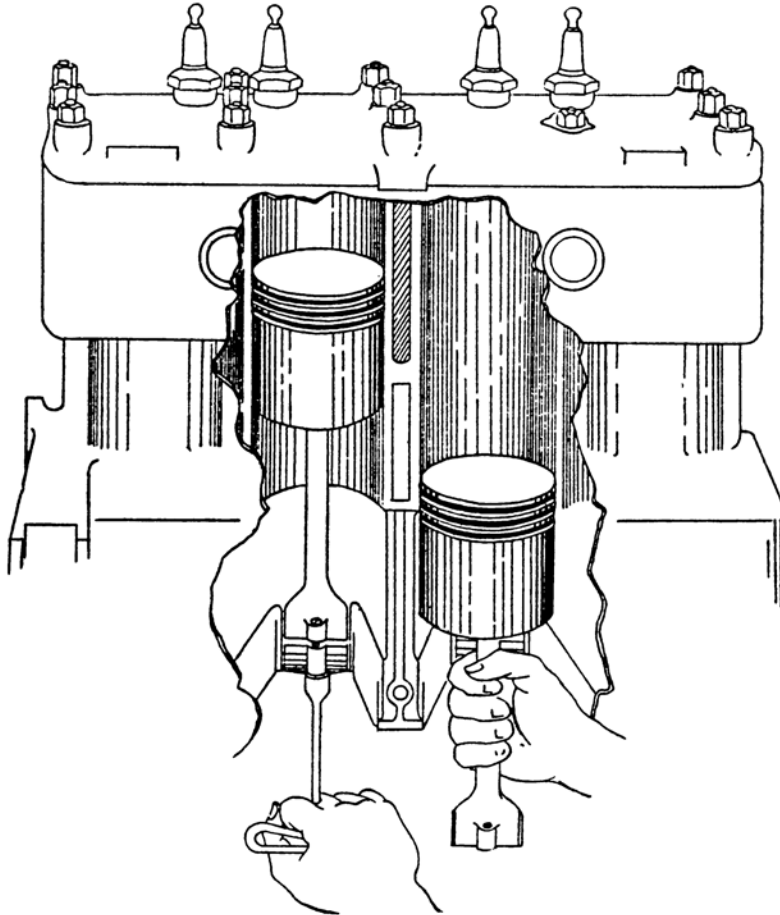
Removing Connecting Rods and Pistons from 3½" Bore Motor
